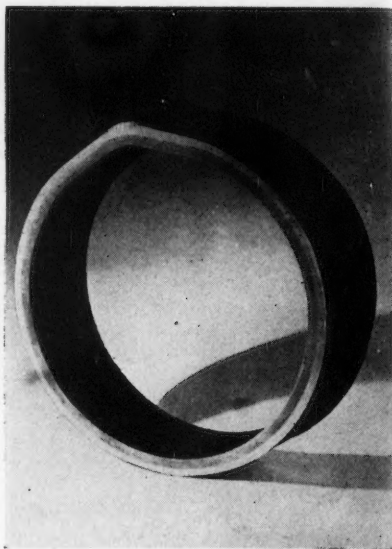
Section of outside-clad steel tube used in caustic fusion equipment.
